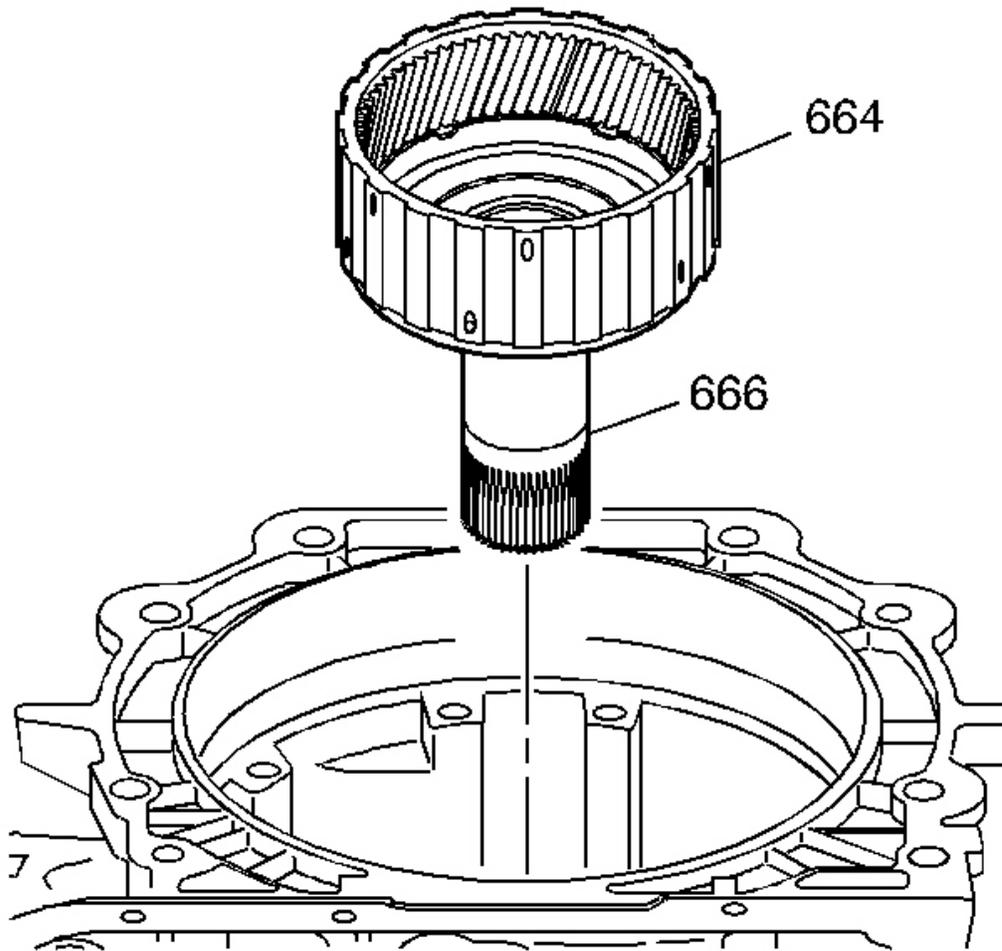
Input Internal Gear & Reaction Carrier Shaft Assembly
